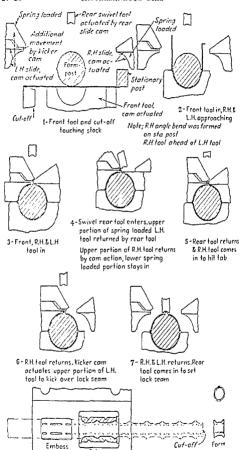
Forming a part with a lock seam with tooling on a multiple-dide press. (U.S. Tool Co., Inc.)
